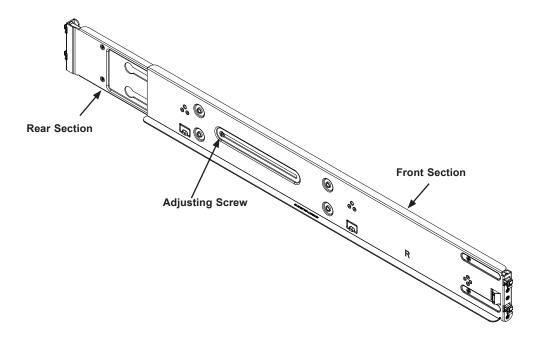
Rackmount Rail (Right rail assembly shown)
